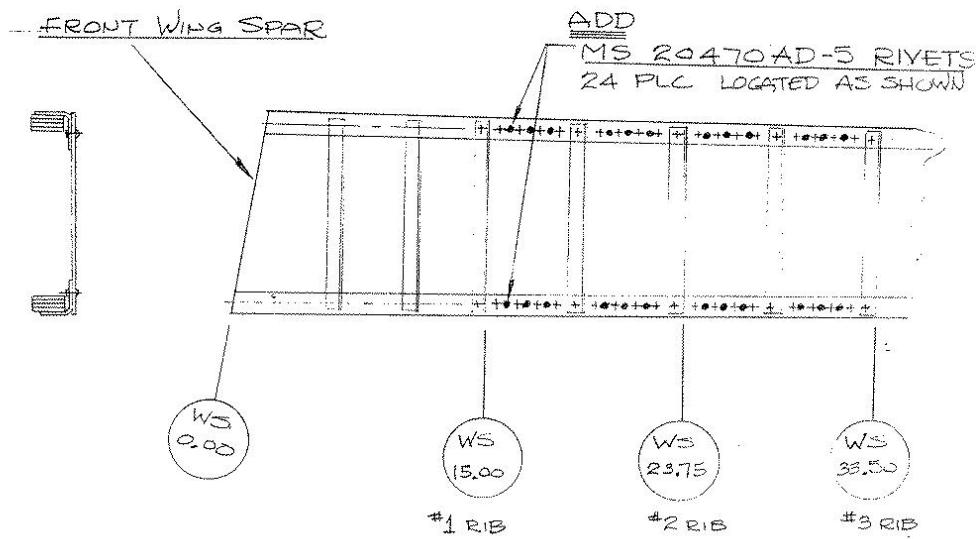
This spar mod may be accomplished with AN3 bolts, if necessary.
